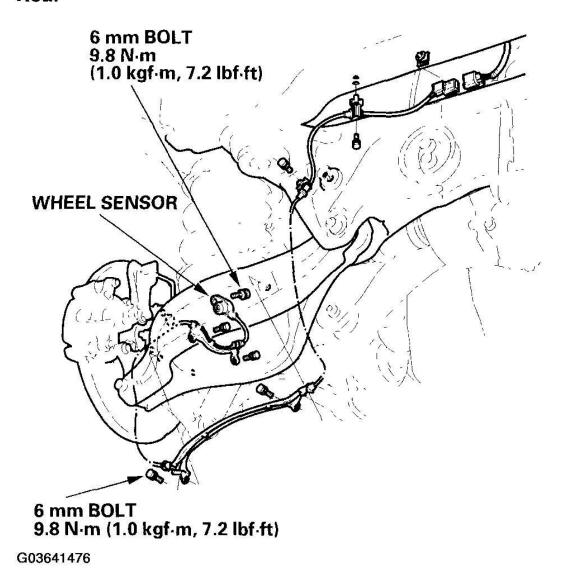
Installing Sensors Carefully To Avoid Twisting Wires (2 Of 2) Courtesy of AMERICAN HONDA MOTOR CO., INC.
